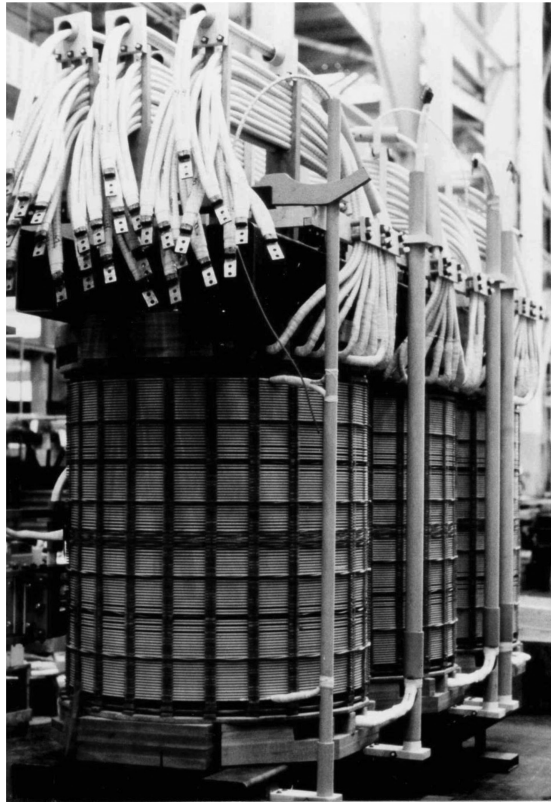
A core-type three-phase transformer with GEAFOL solid dielectric core. (Courtesy of Siemens AG.)
